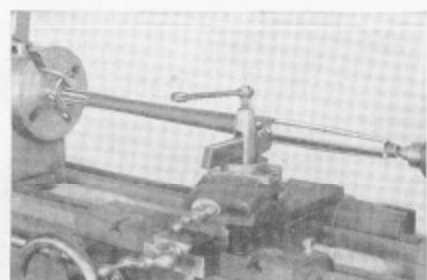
Testing and Straightening a Bent Axle Shaft Between the Lathe Centers.
